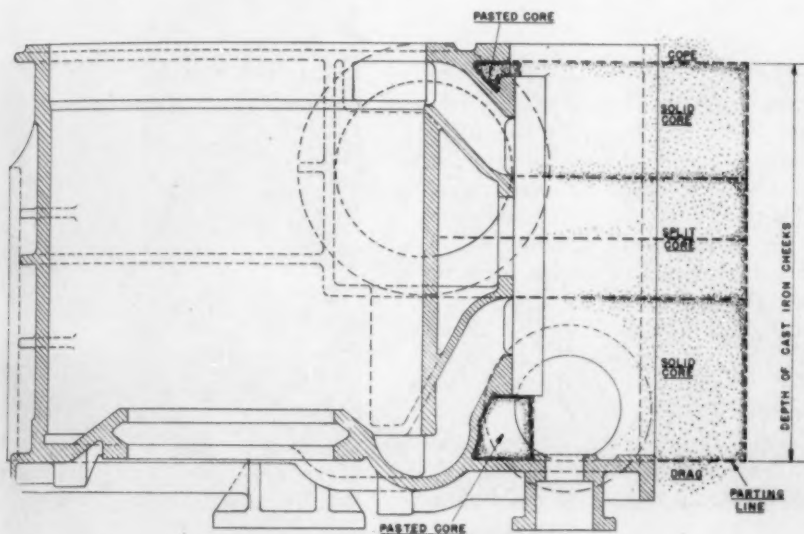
SECTION SHOWING PORT CORE ARRANGEMENT.
